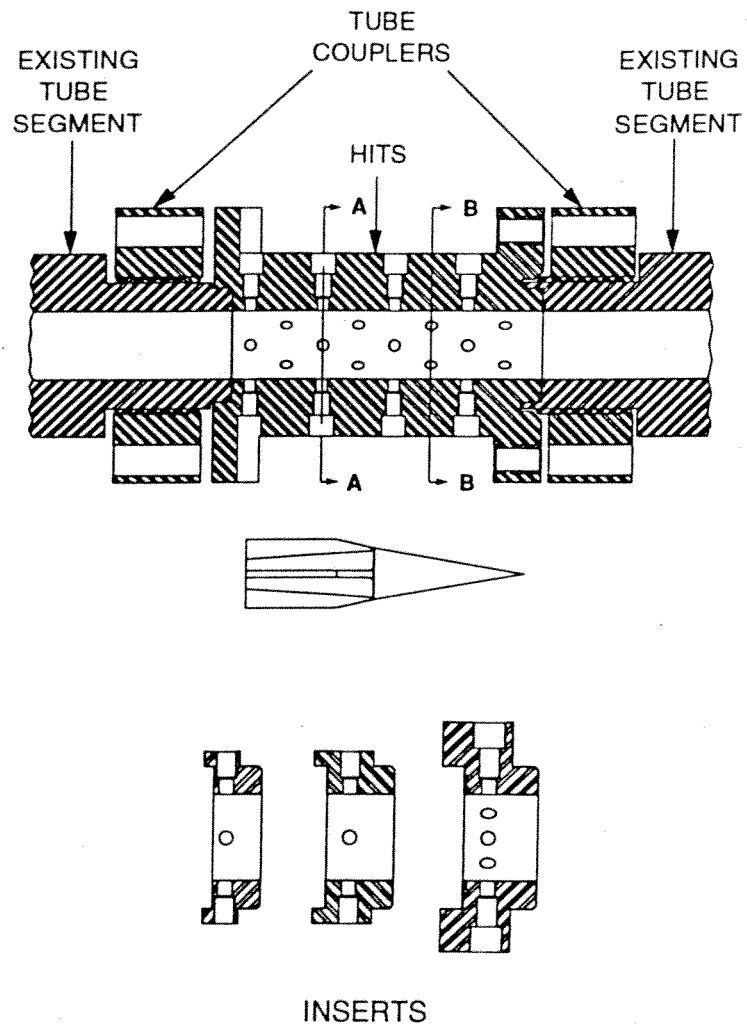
Highly instrumented tube section, inserts and tube couplers. Projectile shown for scale.
